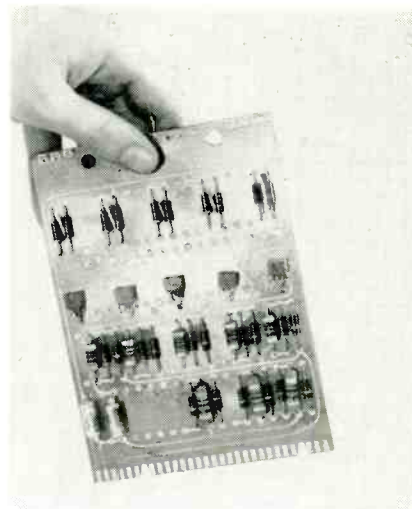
Shiny coat on panel is deposit of soldering flux left after assembly.
